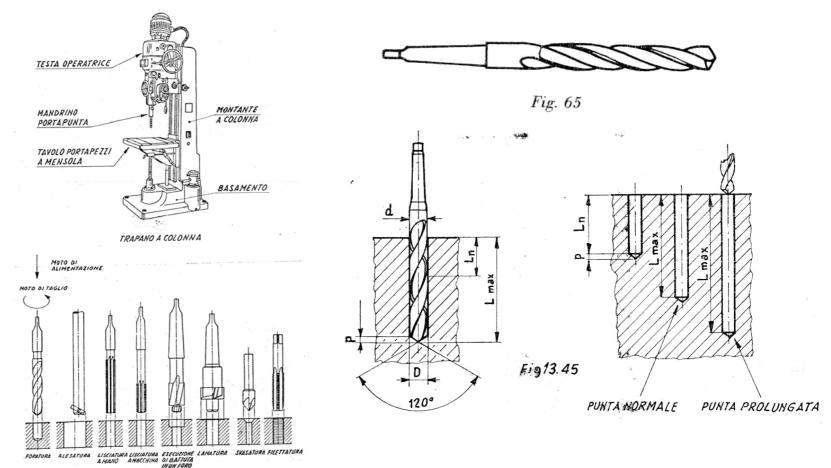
Schematic illustration of a drill press. Drilled holes, plain or tapped, are used for assembling parts, or for providing passages for air or fluids in a variety of machines and equipment. In radial drilling machines, the head is installed on a radial arm thus permitting drilling of holes at various distances from the column.
